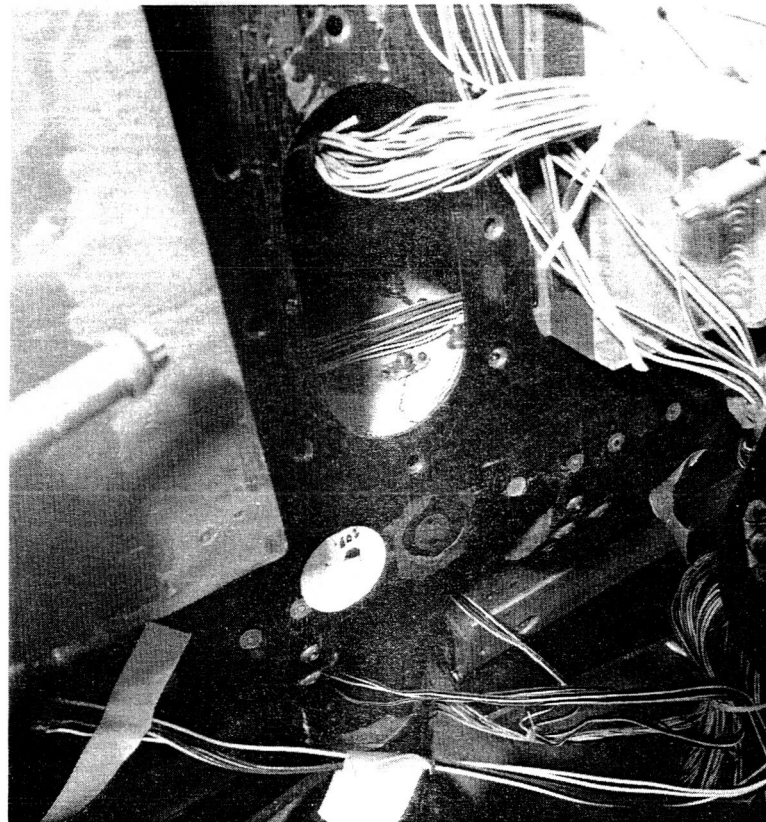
Full-Scale Test Elevator Front-Spar Failure at Station 172—Fail-Safe Test
